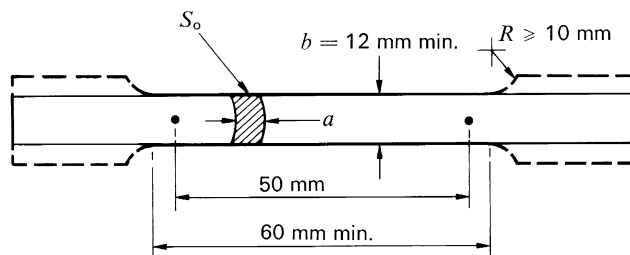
Test specimen dimensions for pipes and tubes - II
